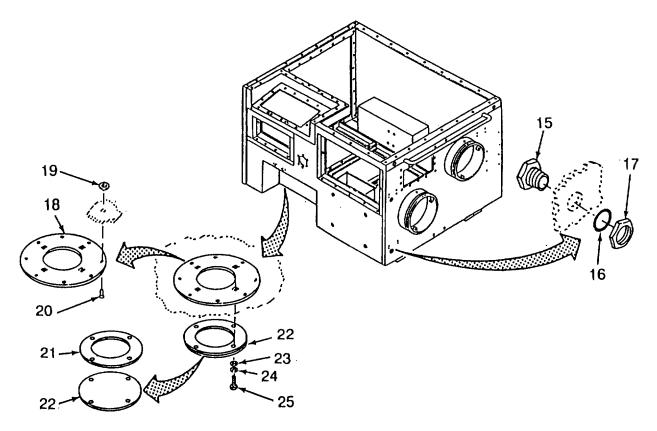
Frame Assembly (Sheet 2 of 2)
